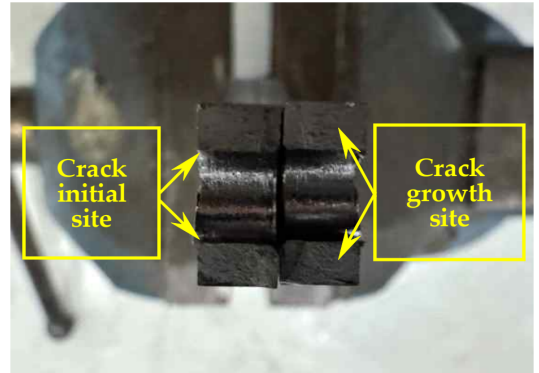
Fracture surfaces of specimens after vibration fatigue endurance test
